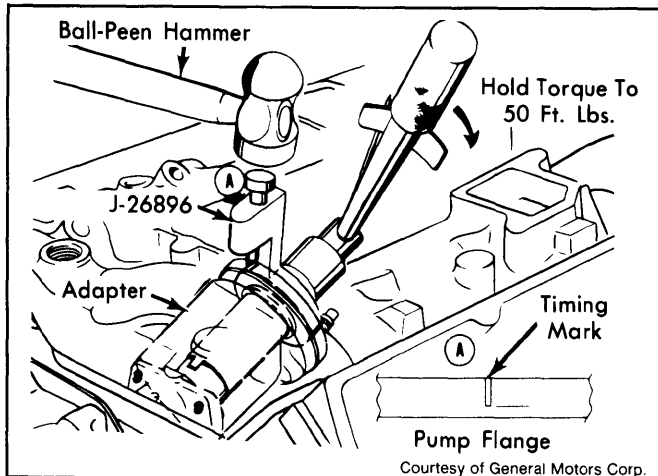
Holding Torque On Adapter While Marking Timing Marks
